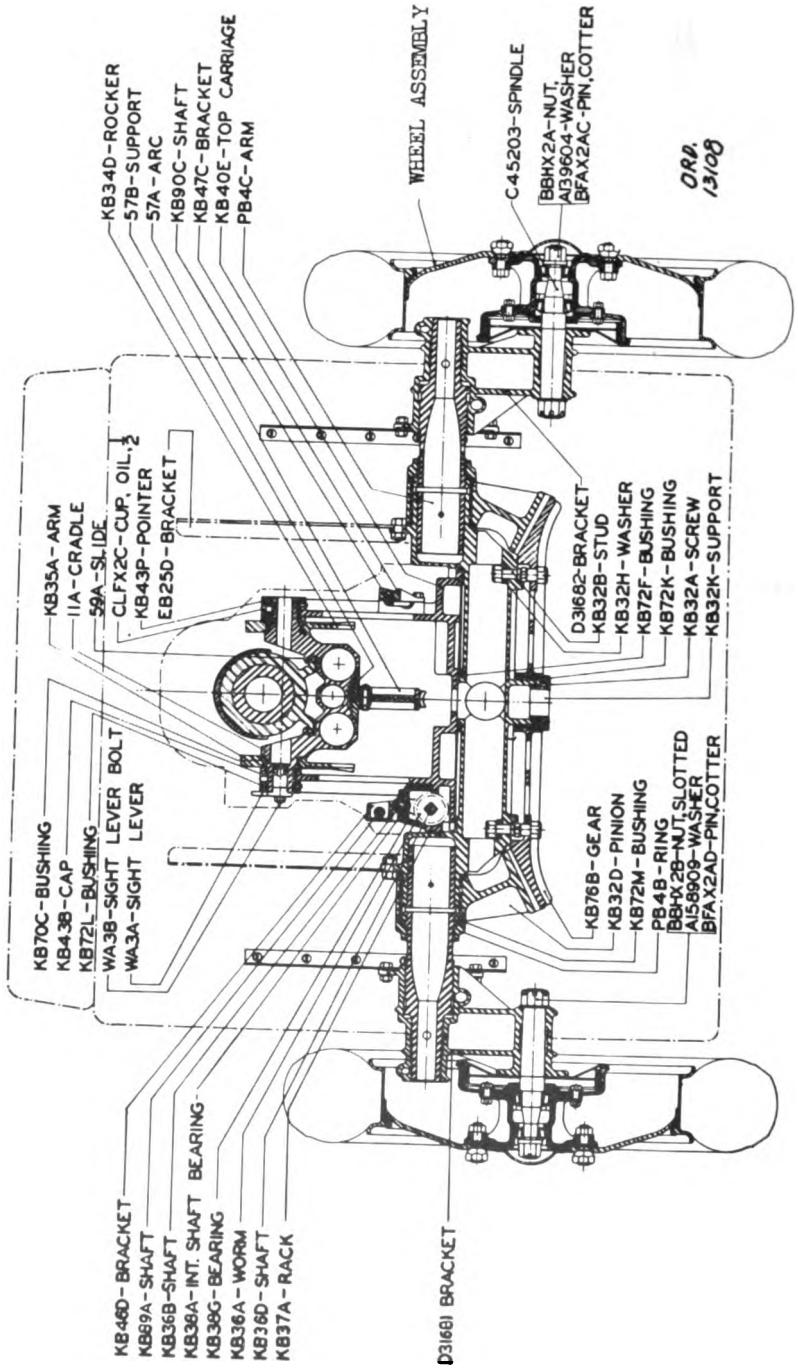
75-mm. gun carriage, M1916A1 (left elevation).
